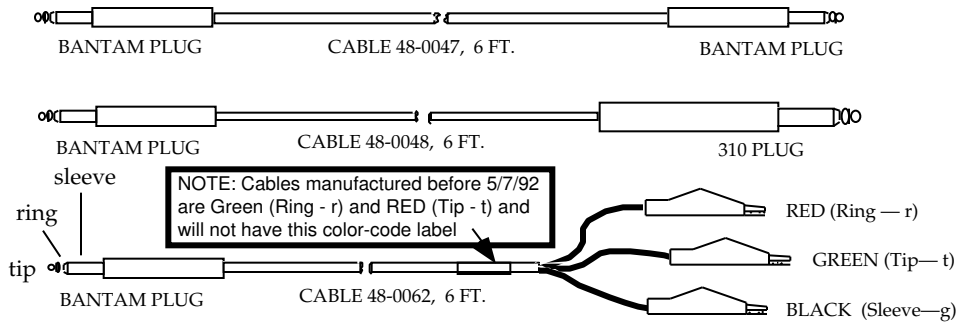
Cables for AM8a Front Panel Test/Meter Connections
